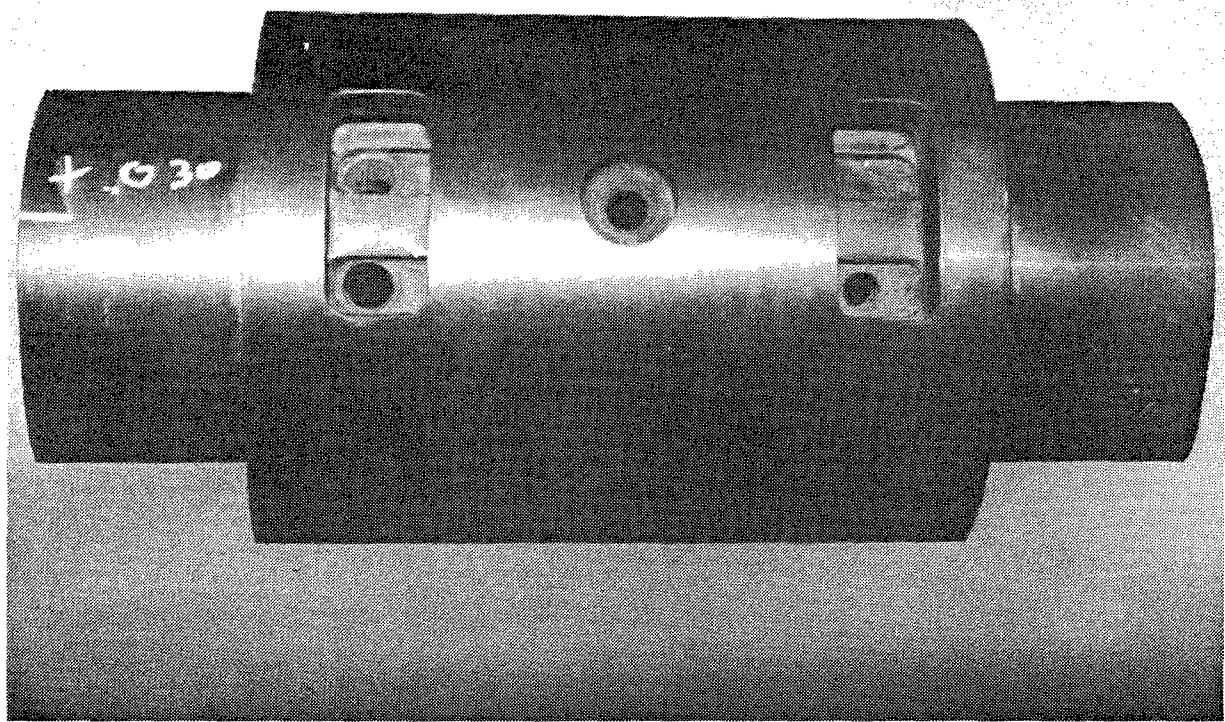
SASC Cylinder Assembly (Initial Design)
